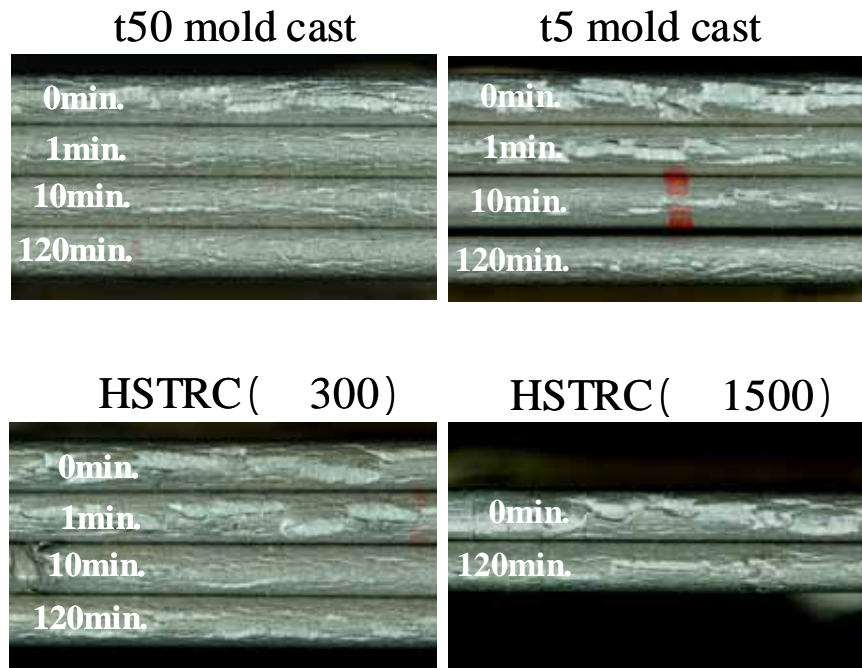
Appearances of specimens after bending test of T4 sheets.
